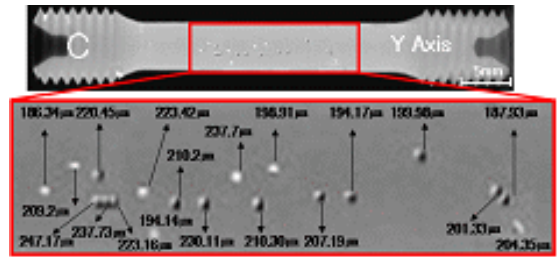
Images and sizes of defects within the gauge length of a tensile specimen
